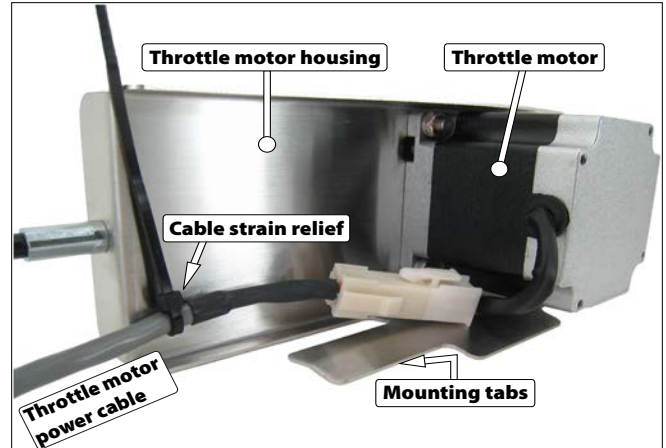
Throttle motor housing (back) showing throttle motor power cable connection and strain relief. Actual connectors may be different than shown.
